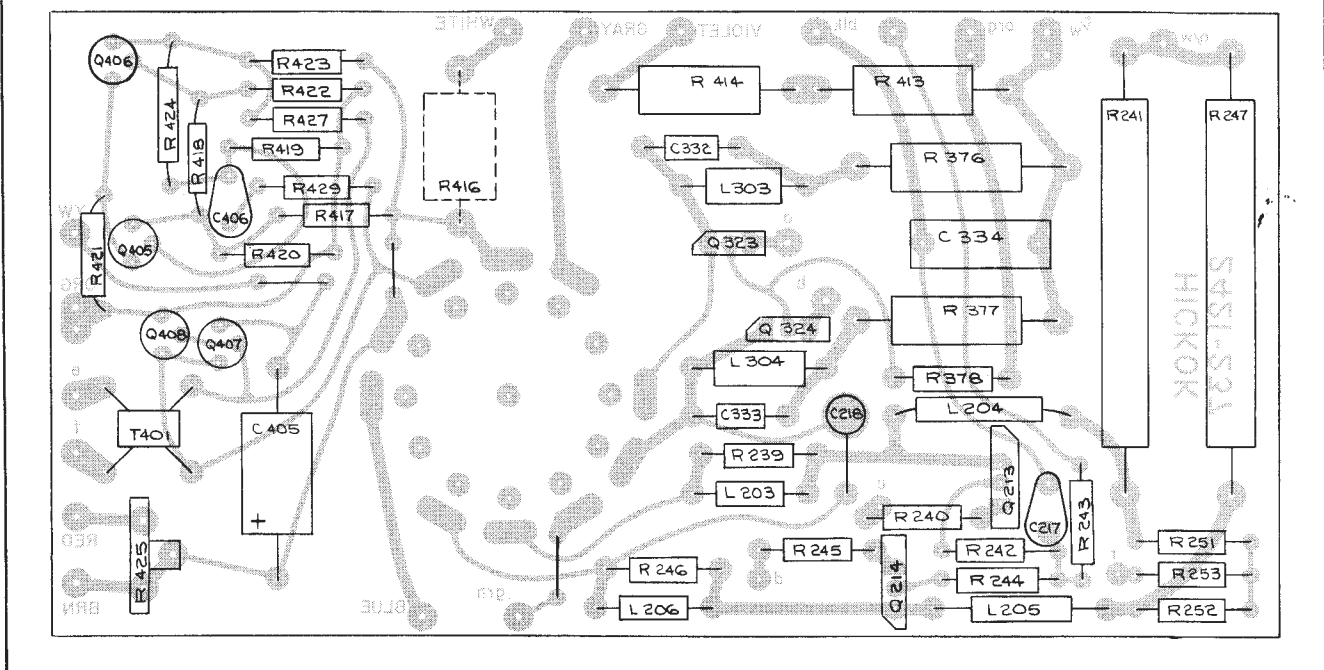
Final Amplifier and Blanking Circuit PC Board, Parts Location
